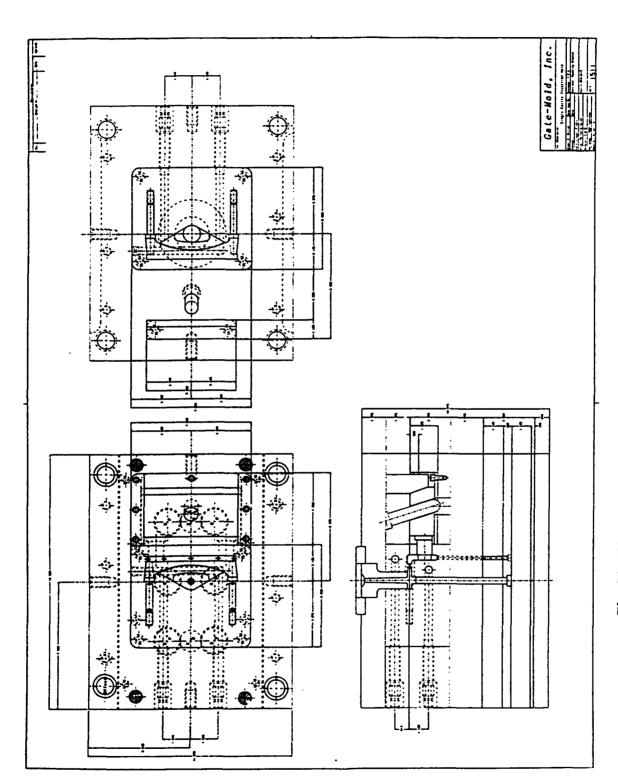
Unmodified TR-317 bracket mold design drawing
